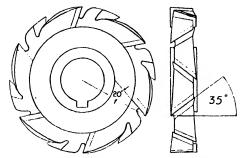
Side and Face Cutter for Milling Magnesium Alloys (F. A. Hughes, Ltd.)
